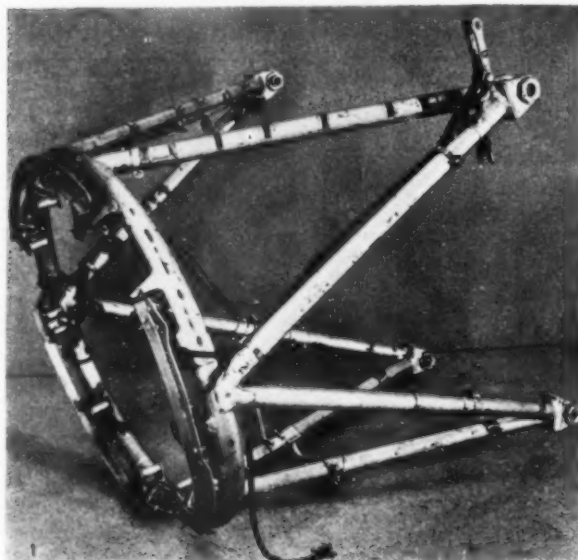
General view of the Bramo Fafnir 323 P. engine mounting.
